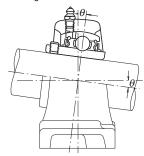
Permissible Misalignment of Ball Bearing Units
